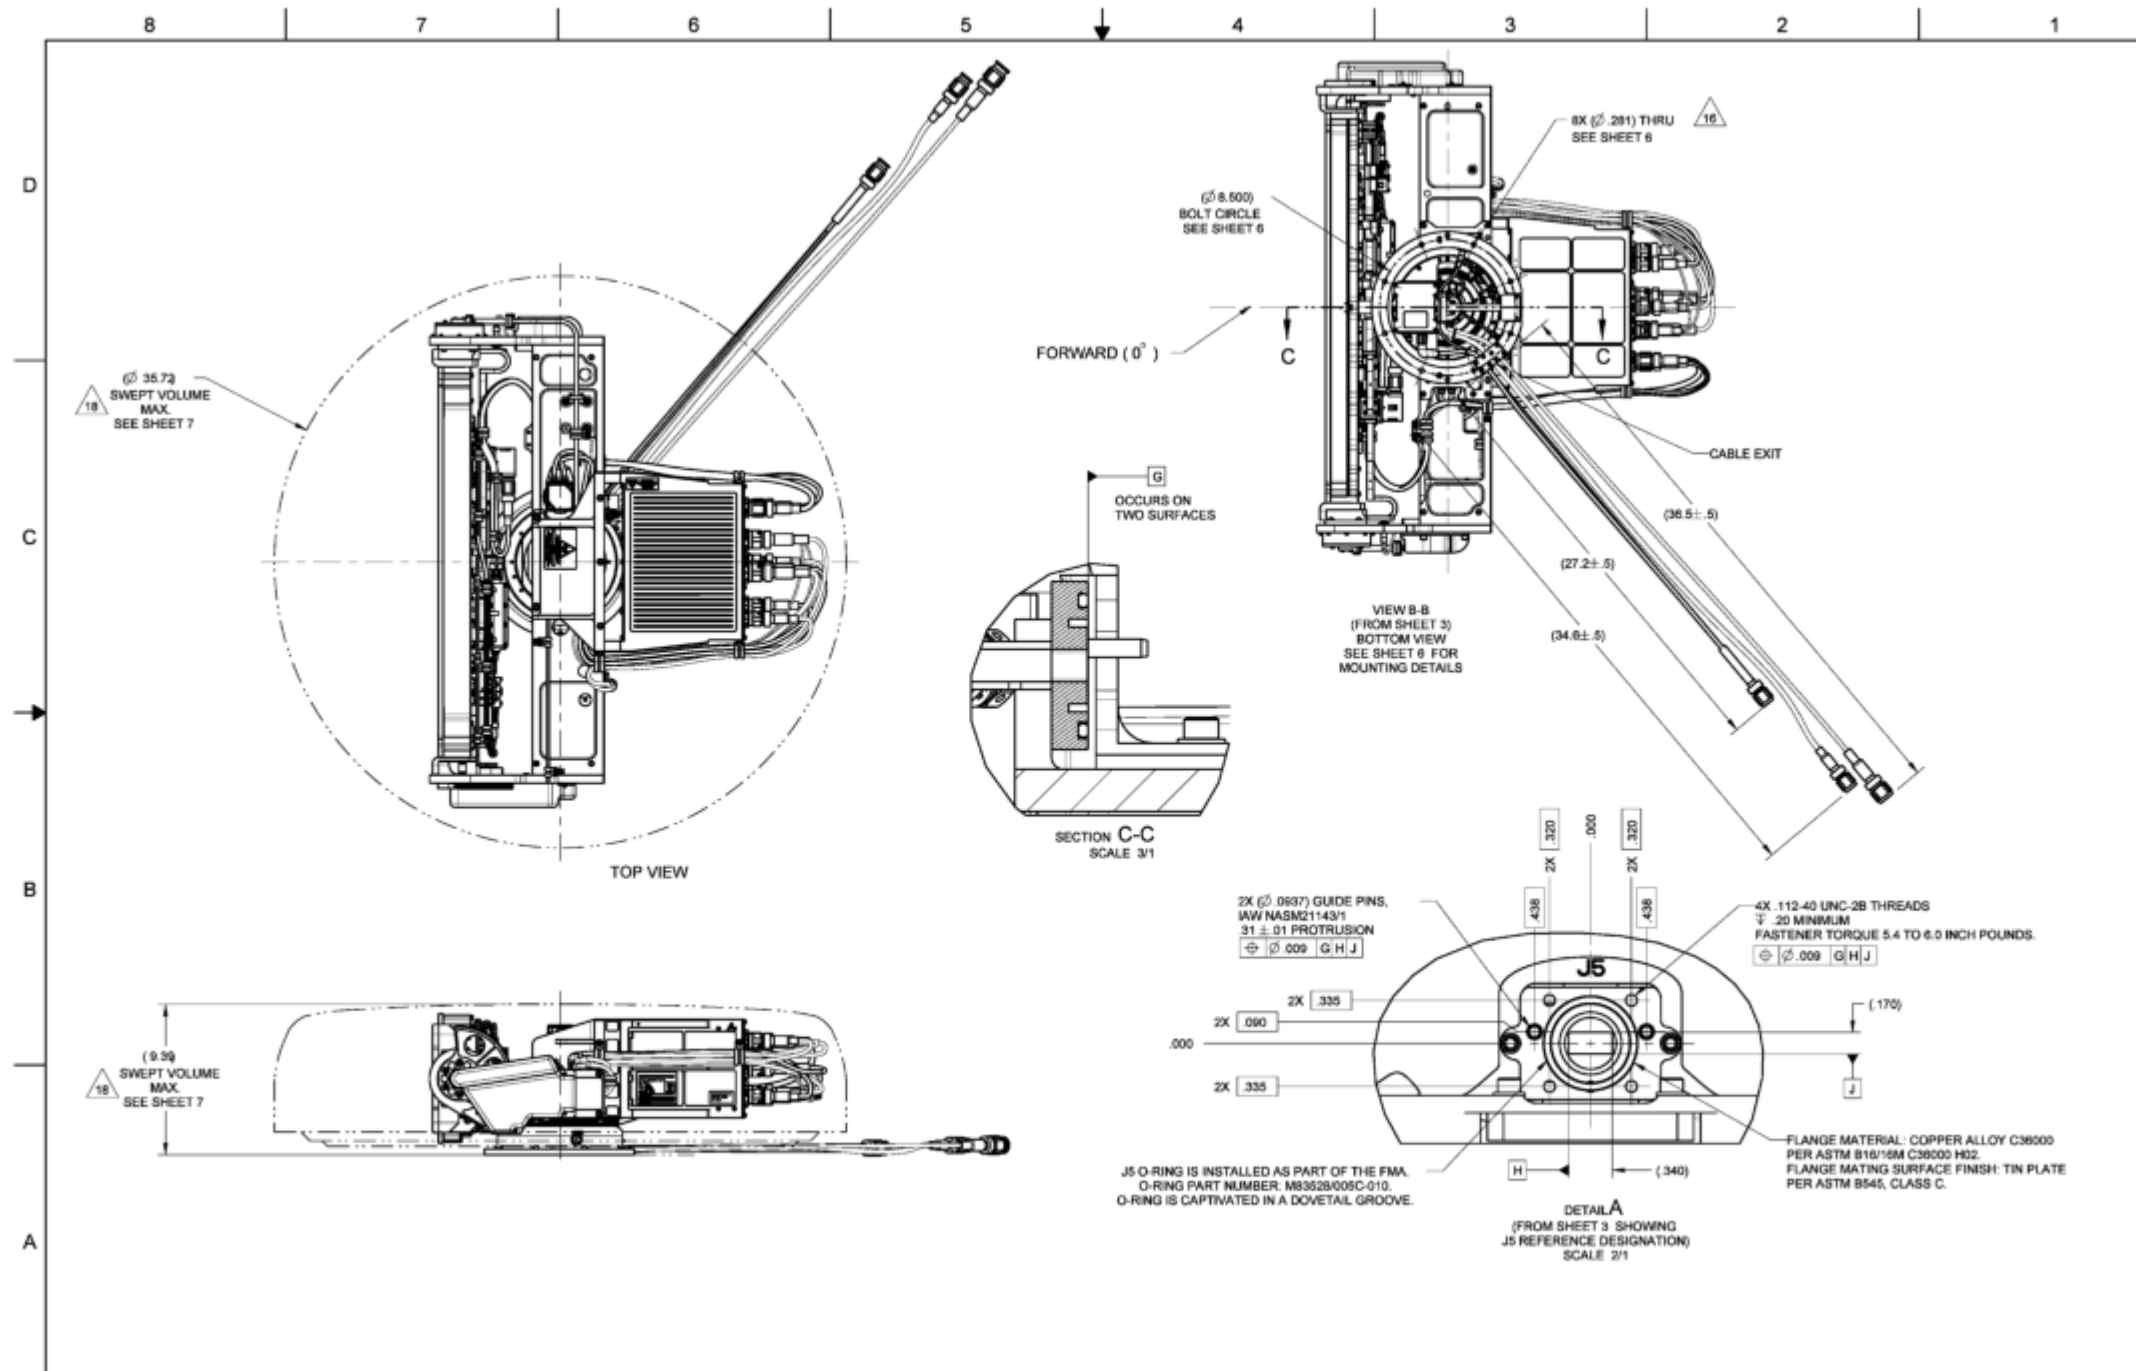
(Sheet 3 of 14) FMA Outline and Installation Drawing (90002609-001)
